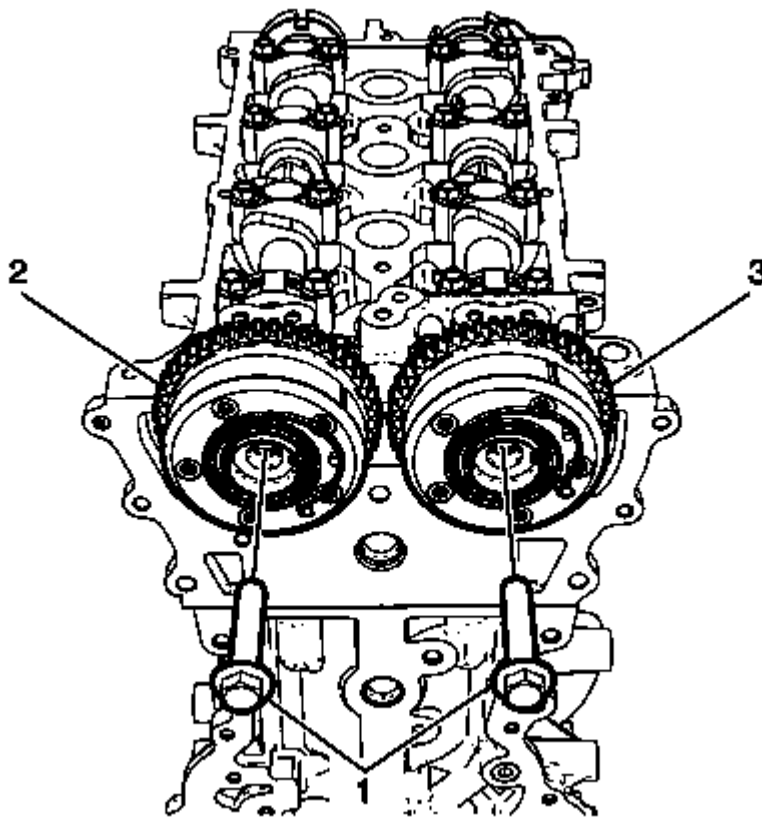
Intake And Exhaust Camshaft Sprocket Bolts
